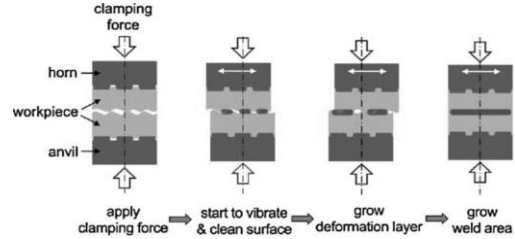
Schematic of ultrasonic welding process [4]
